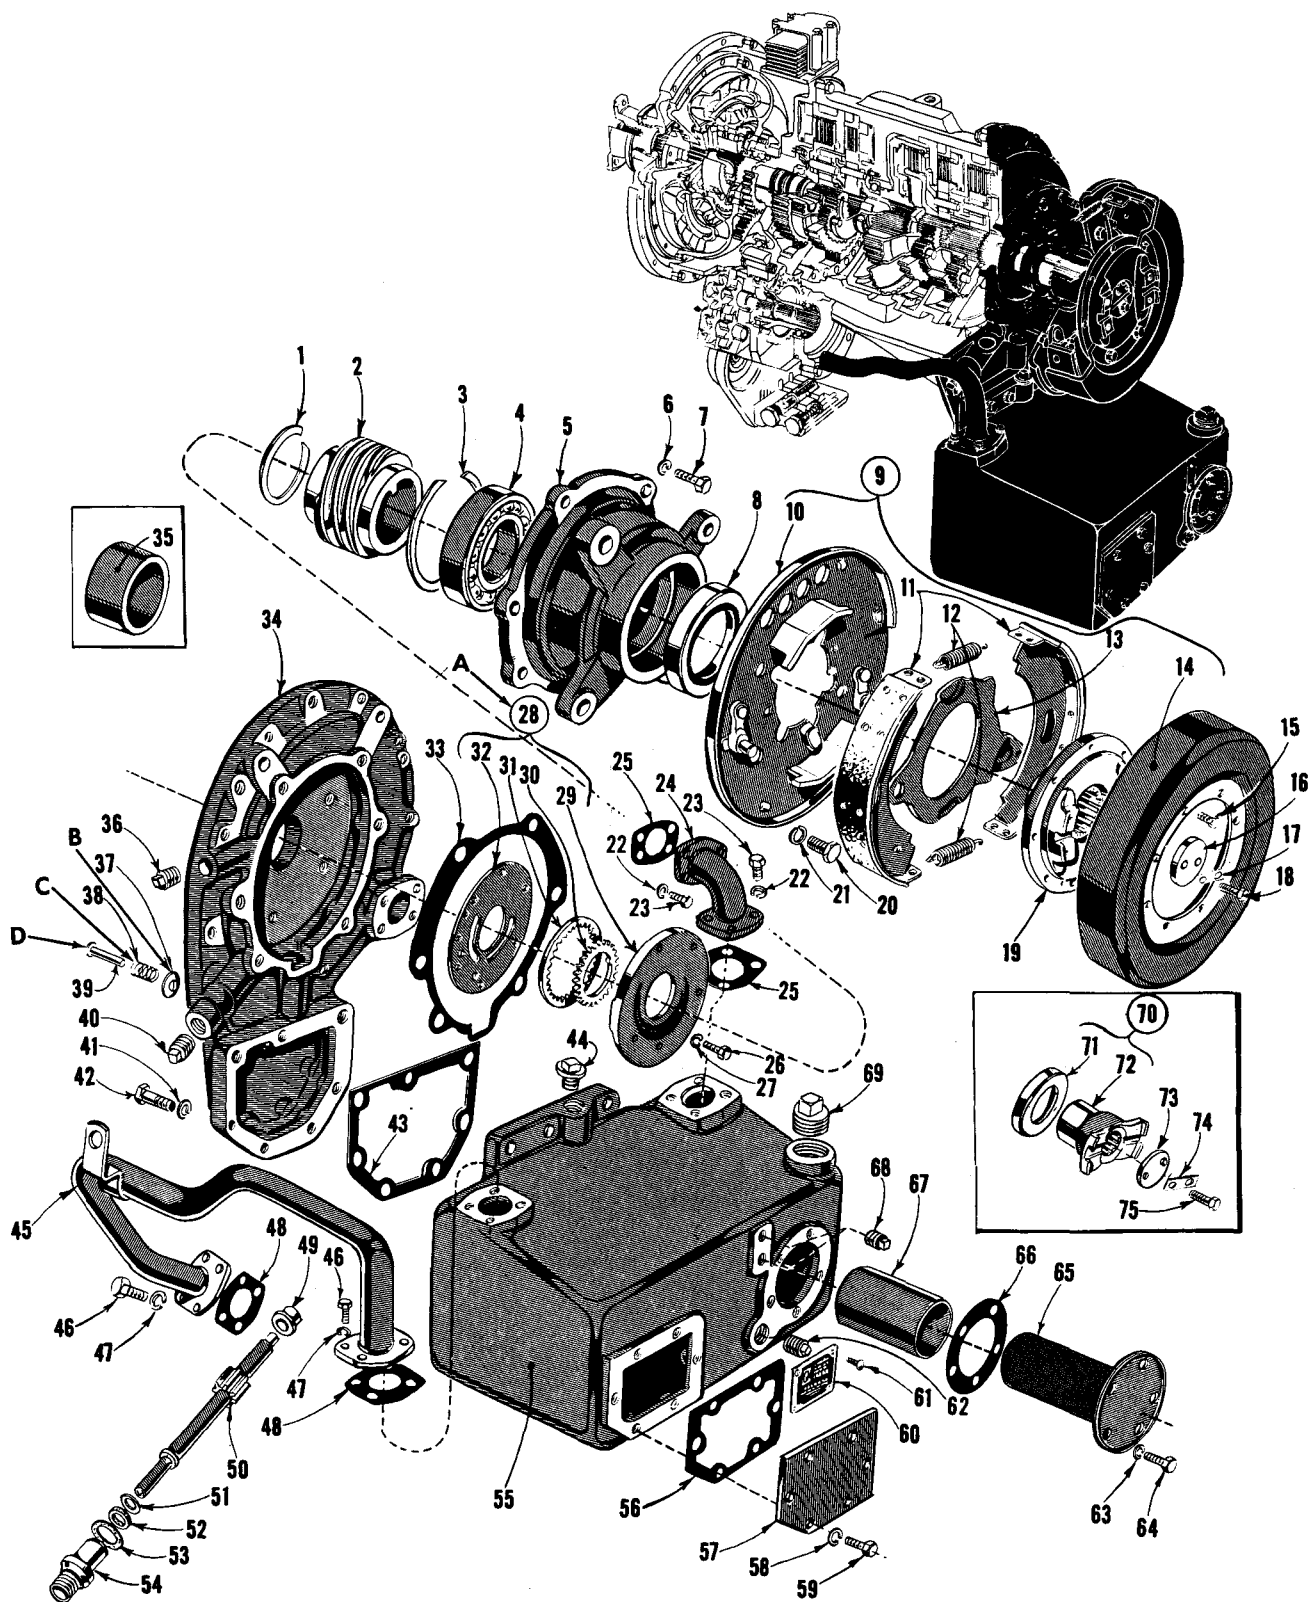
Model CRT-3330-3 oil sump adapter, output driven oil pump assembly, parking brake assembly, and oil sump, exploded view
